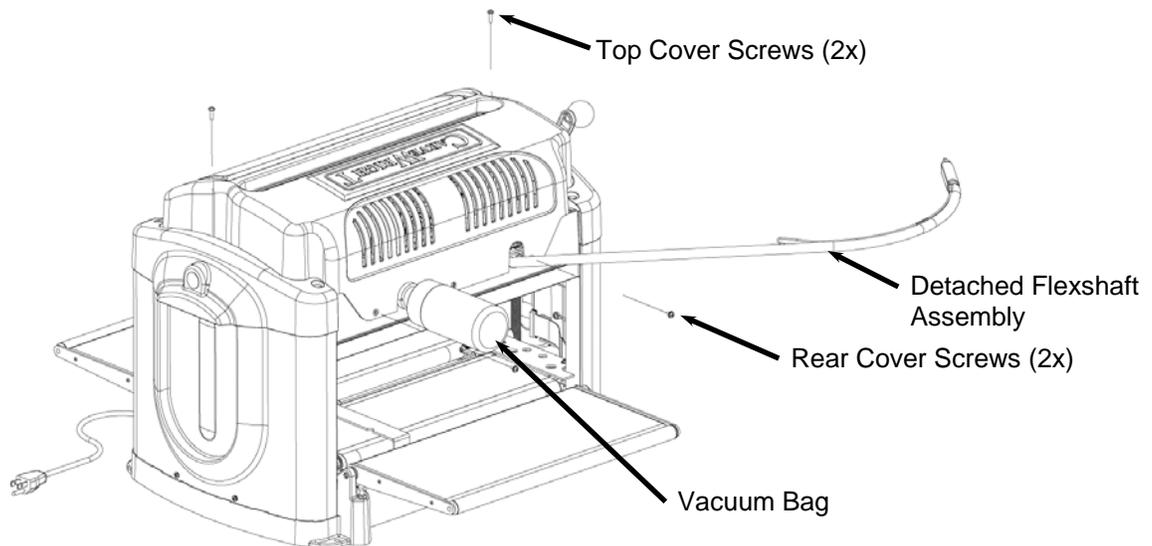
EXTERIOR VIEW OF THE FLEXSHAFT AND HEAD COVERS
